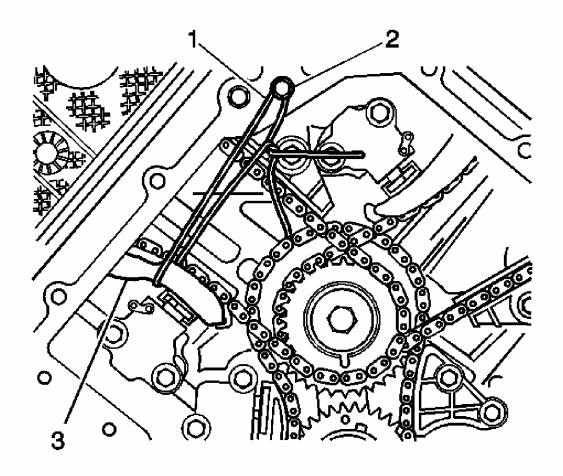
View Of Mechanics Wire, Right Secondary Camshaft Drive Chain Shoe & Front Cover Bolt Courtesy of GENERAL MOTORS CORP.
